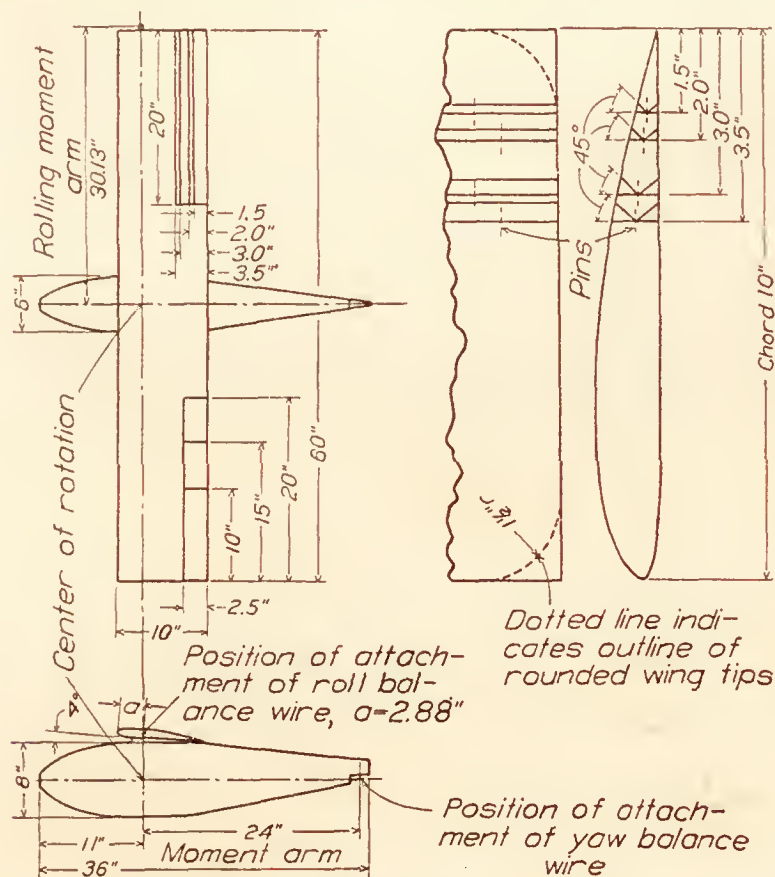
Varying aileron chord end of wing, Clark Y section, showing method of hinging ailerons. U. S. A. 27 similarly constructed
